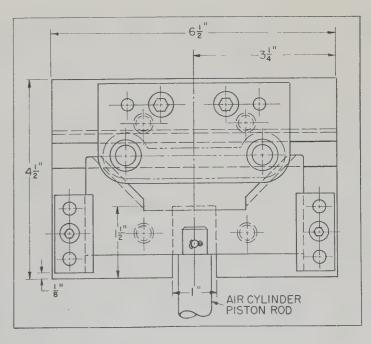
(right)—Top view and end elevation of airoperated jig, showing how workpiece is clamped in place for drilling operation
